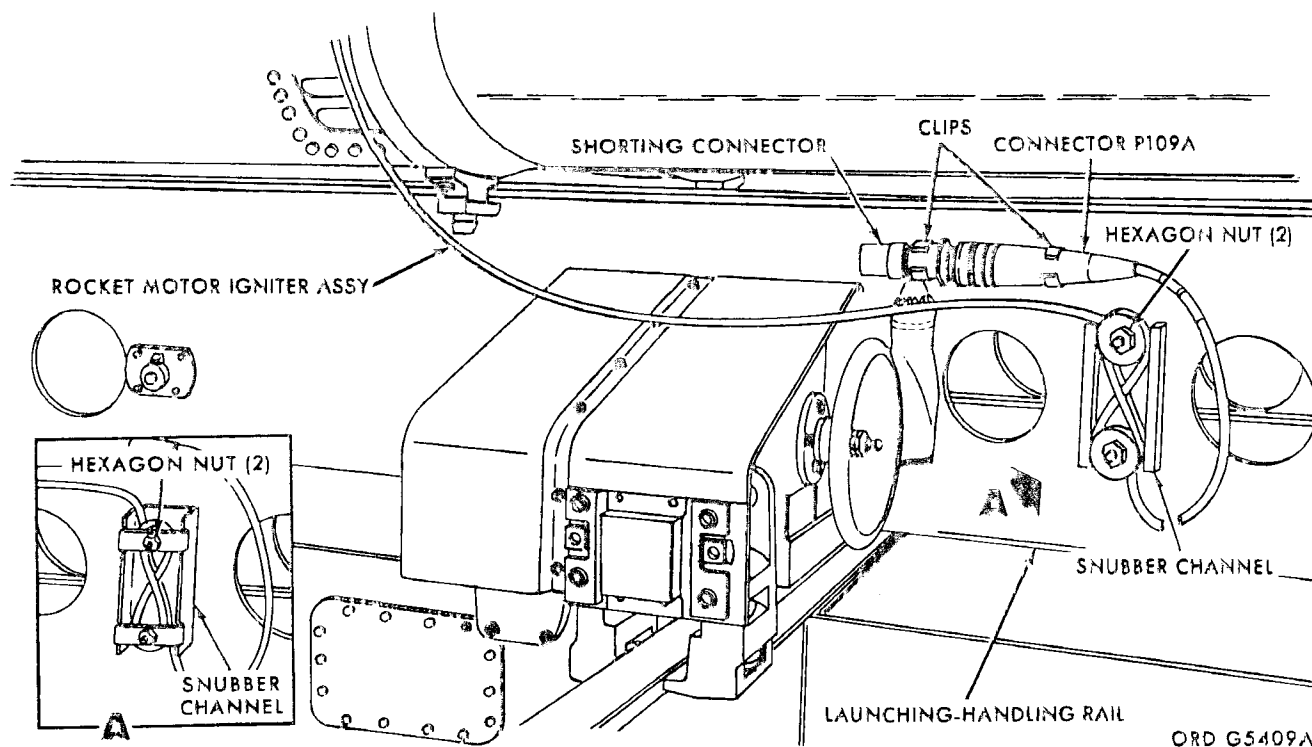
Rocket motor igniter cable assembly stowed on the launching-handling rail.
